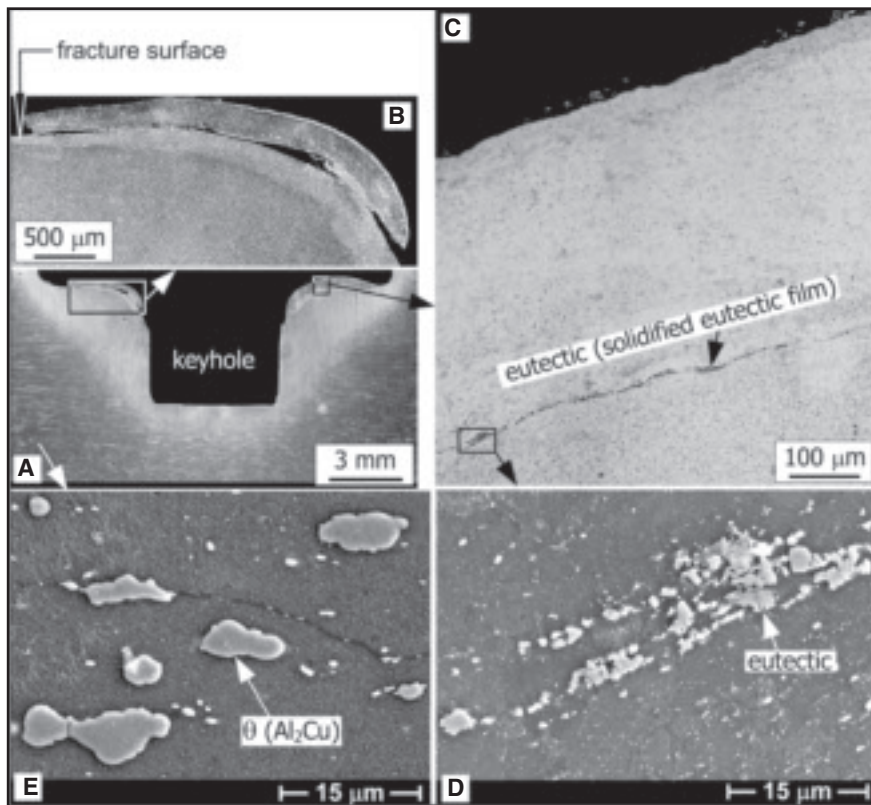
High concentration of eutectic particles suggesting presence of eutectic liquid film caused fracture. A — Vertical weld cross section of weld in Fig. 12; B — broken piece on fracture surface; C — string of eutectic particles at location corresponding to fracture surface in B; D — SEM image of eutectic particles in the string; E — SEM image of θ particles far away from weld.
